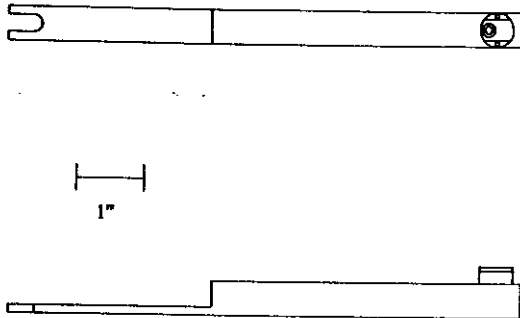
The fixture used for setting the angle of the drive. The cap on the end fits over the end of the shaft when the normal cap with pin is removed. The notch fits over the post on the center locating fixture so the rotation of the shaft is determined at either  $0^\circ$  or  $180^\circ$ .
